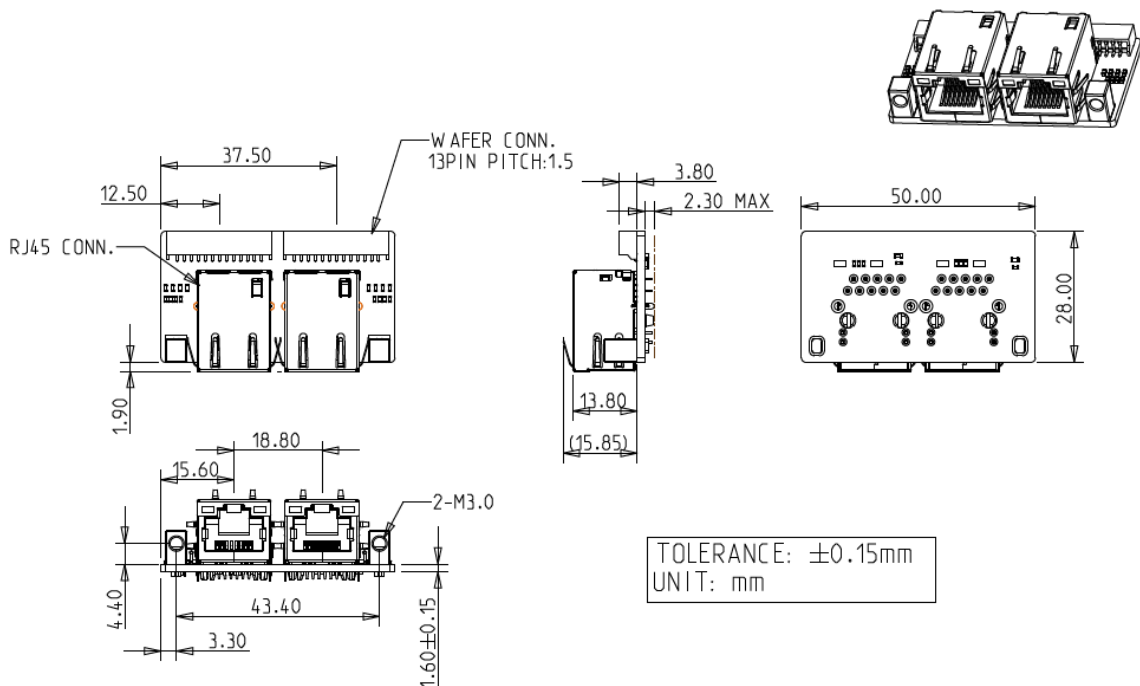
Mounting Hole Daughter Board Drawing (EGPL-22S4-C1/W1)
